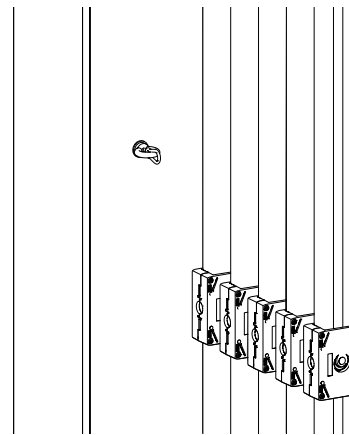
The housing halves of the fall arrest device are mounted on all poles.
